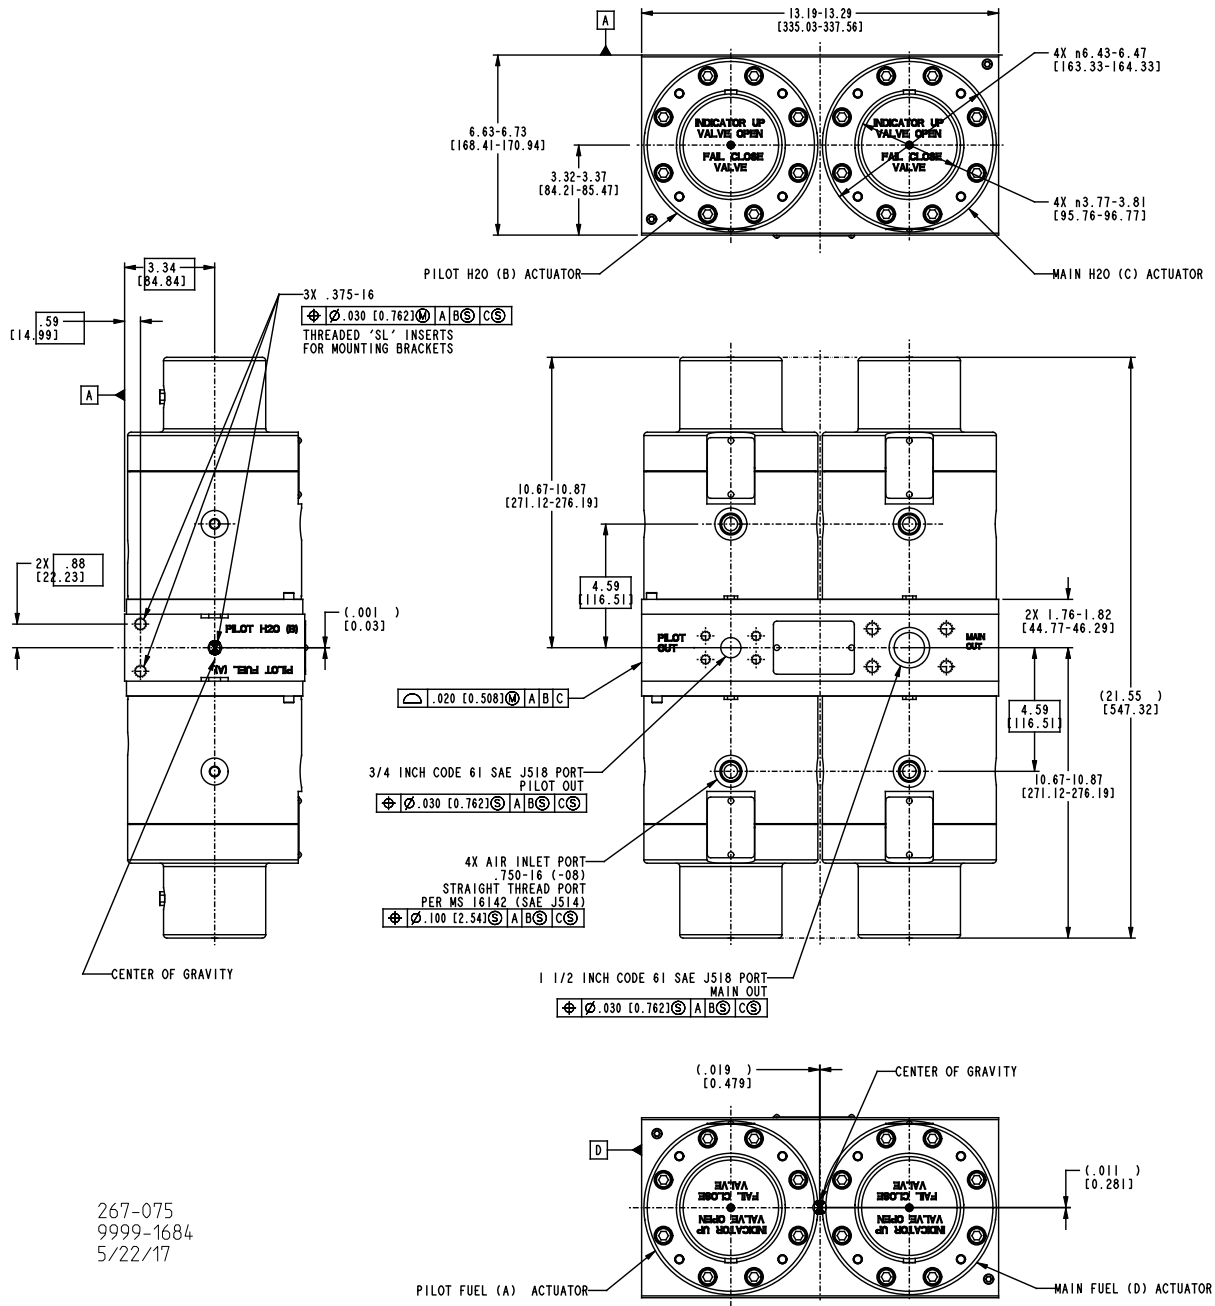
LXM Outline Drawing (All Fail Close (FC) Actuators)
